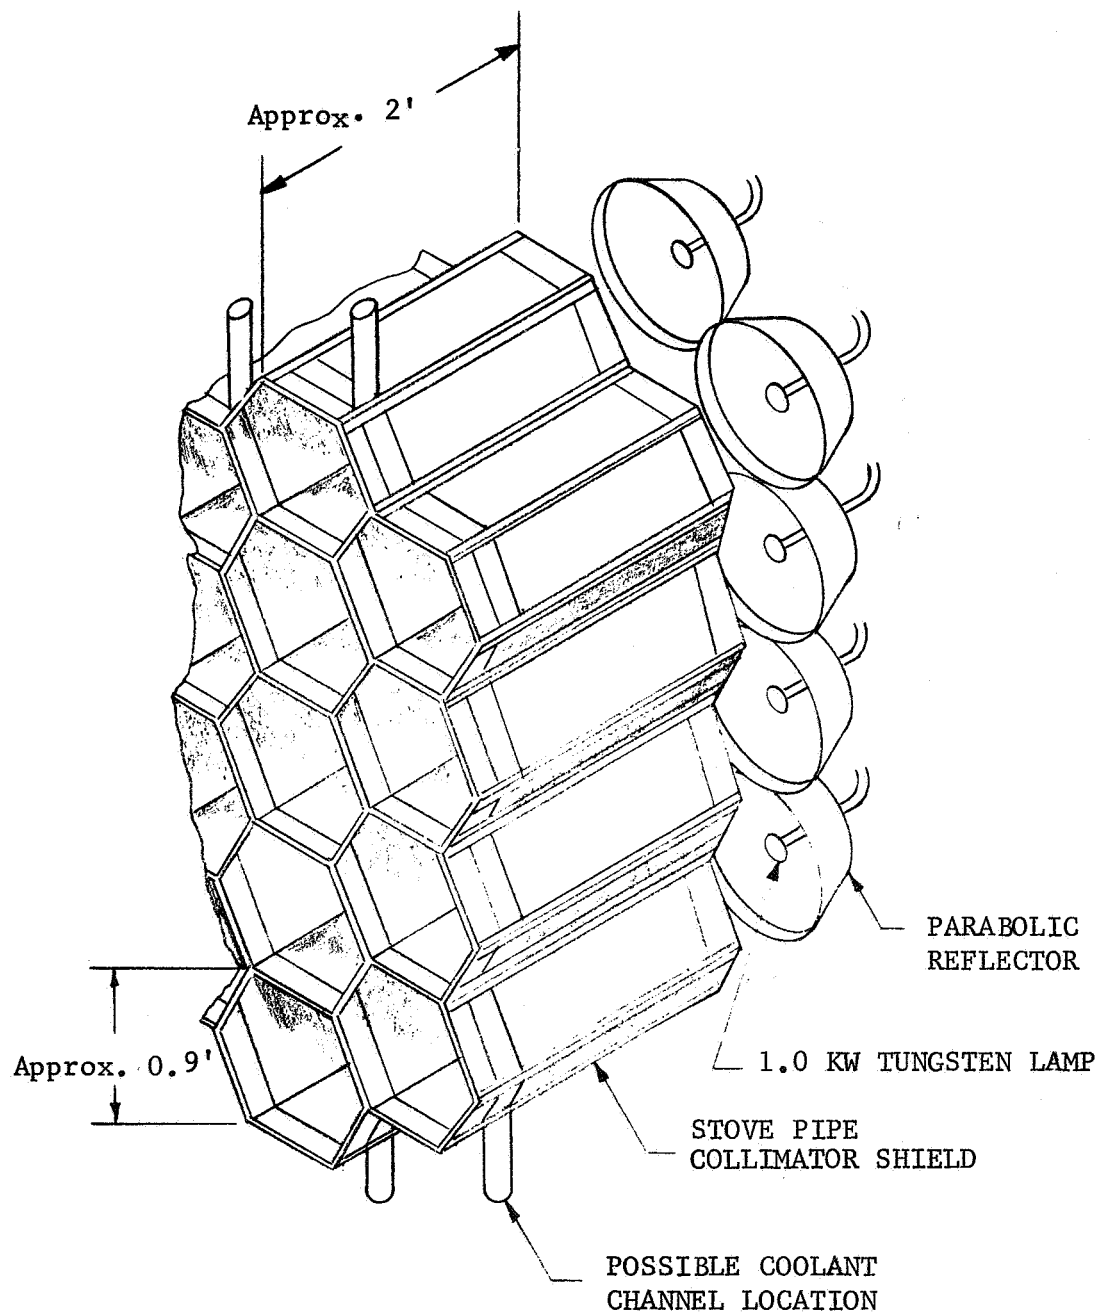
TUNGSTEN LAMP ARRAY ASSEMBLY,
